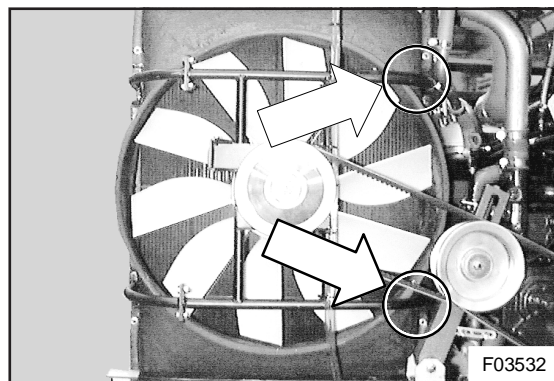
Fan and clutch carrier retaining bolts (right hand)
